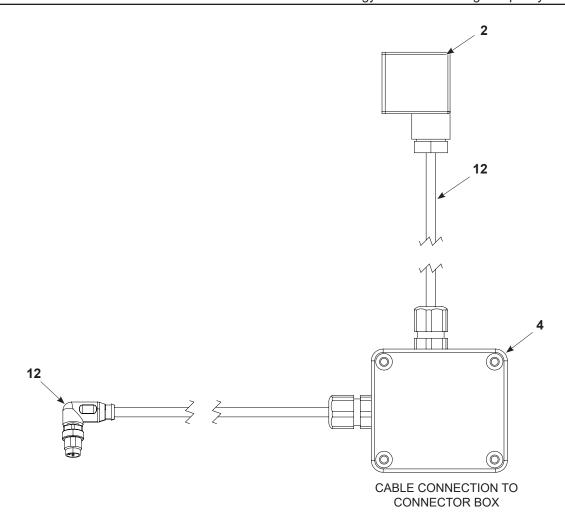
Electronic Control Kit Assembly View (2 of 2)
